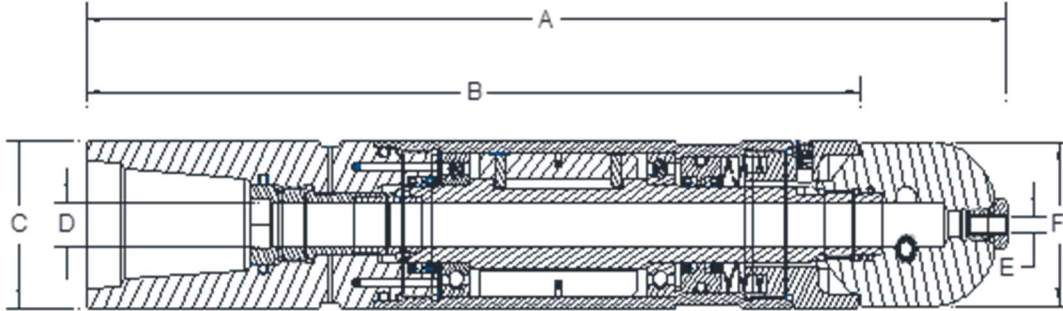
HPHT Rotating Jet Wash Tool physical characteristics illustration.
